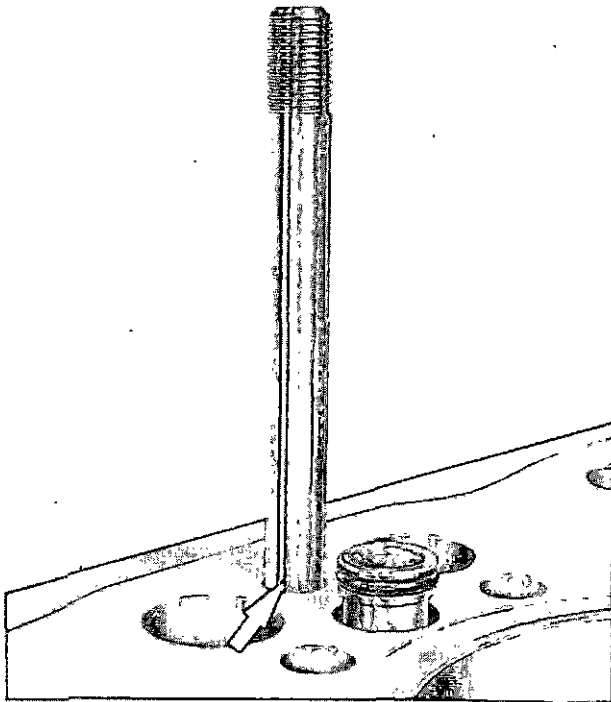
Cylinder head oilway stud (drilling arrowed) T720039
